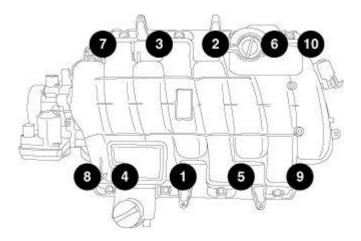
Intake Manifold Retaining Fasteners Sequence Courtesy of CHRYSLER LLC
